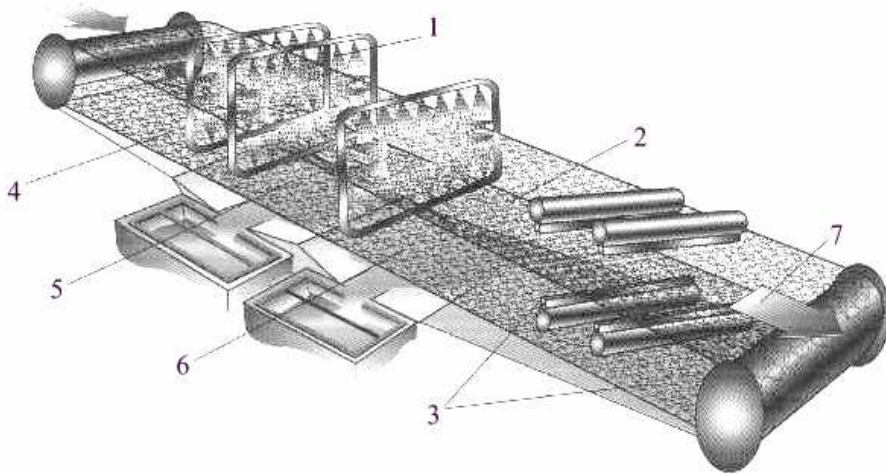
Tunnel type modular conveyor washers: 1 – nozzles, 2 – steel net, 3 – nozzles of hot and cold air, 4 – conveyor tape of stainless steel, 5 – first section of washers, 6 – optional subsequent section, 7- optional heater of parts before leaving the washer.
